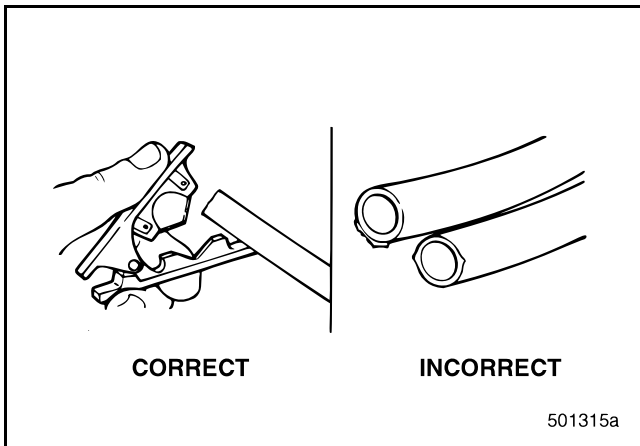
Use a Tubing Cutter for Proper Cut Edges
